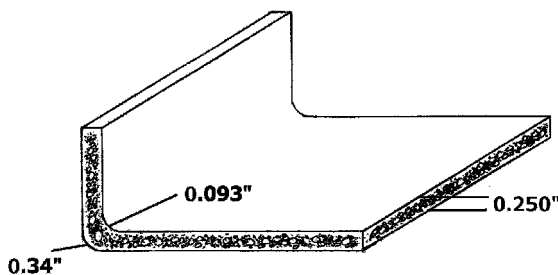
Low-pressure structural foam wall thickness and corner radius details.
